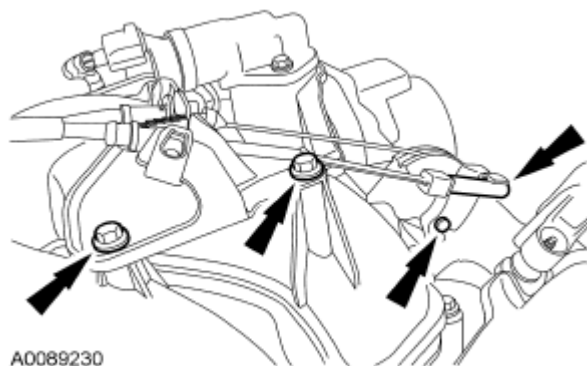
Locating Cable Bracket Bolts (1 Of 2)
